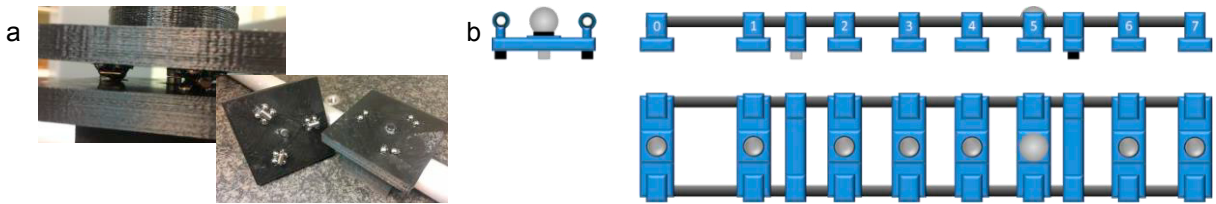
a) Kinematic supports samples manufactured by additive manufacturing. b) Prototype 3.
